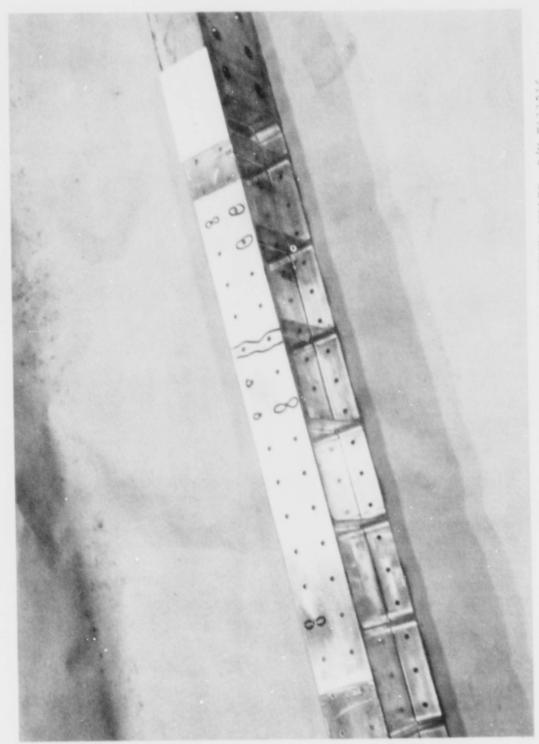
I-BEAM FAILURE LOCATION SYSTEM
